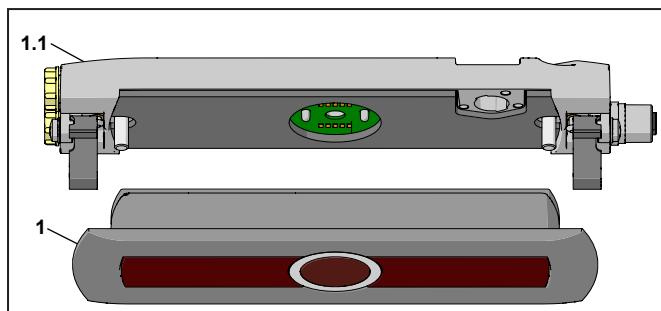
IRIS control box assembly and 5 Vdc power supply
